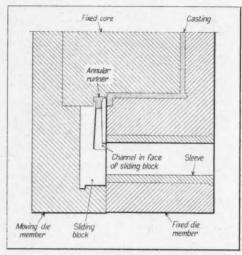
The use of sliding blocks in the face of the moving die member enables a deep casting to be fed at points well inside the edge of the flange
